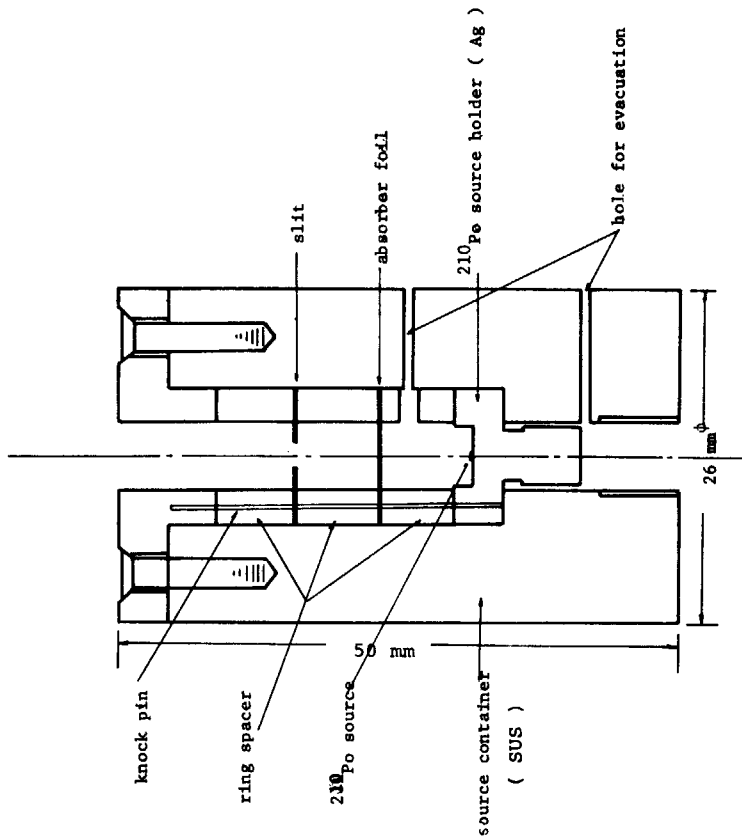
$^{210}\text{Po}$  source assembly. This assembly is mounted on the movable holder.
